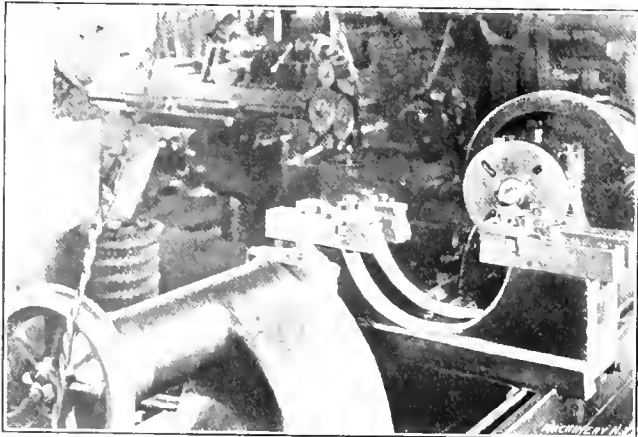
Double-head Tool Carriage for Turning Gear Blanks
